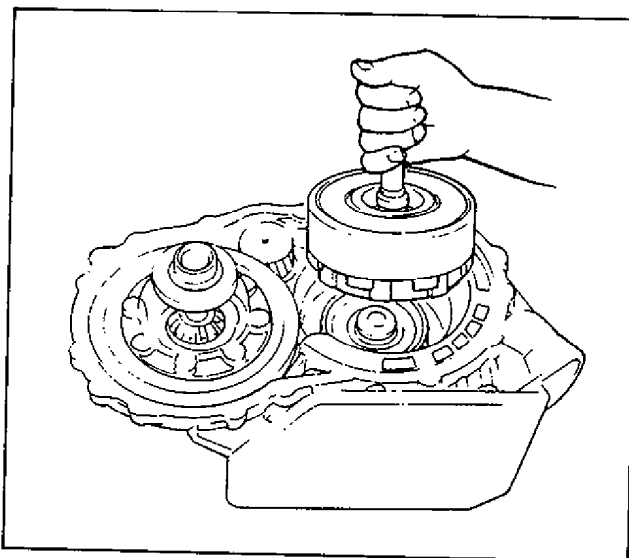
B-213 Installing Input Shaft and Direct Clutch
